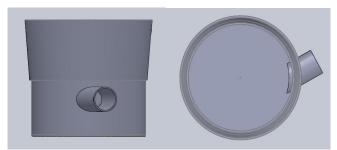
Air Inlet Pipe at 30° Inclined Vertically-Cooling Tower Model
